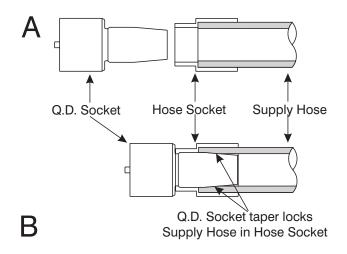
Thread Tapered End of Q.D. Socket into Hose Socket.
